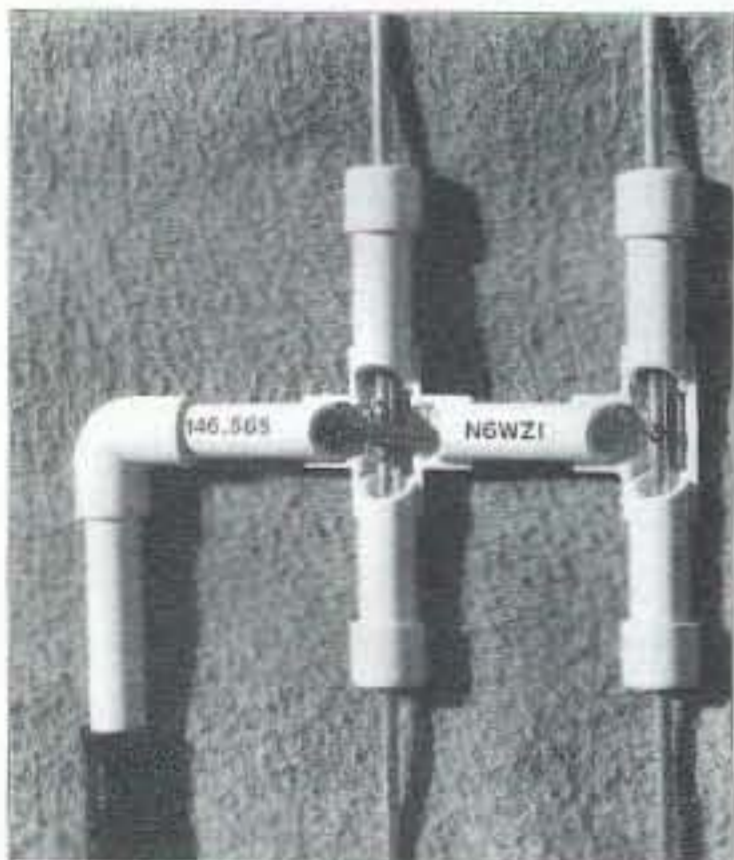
WZI made this special cutaway version of the RDF² to show how it goes together. Each of the six short PVC pipe sections is three inches long. The driven element is in two sections; the gap between them is obscured by the twinlead matching section.
